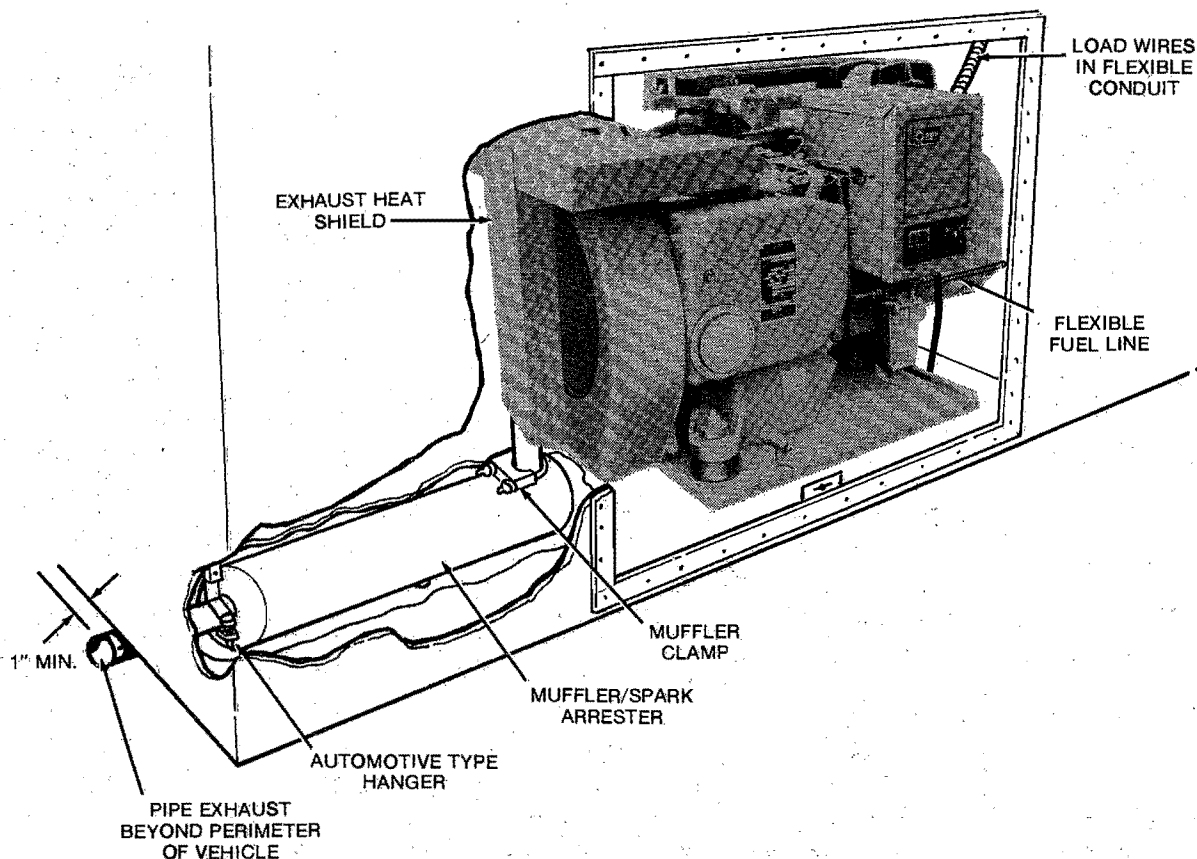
TYPICAL ELECTRIC GENERATOR SET INSTALLATION
